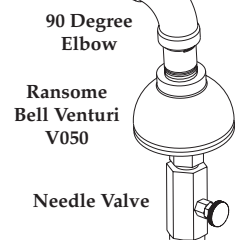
The completed pipe warmer ribbon burner assembly shown ready to install
